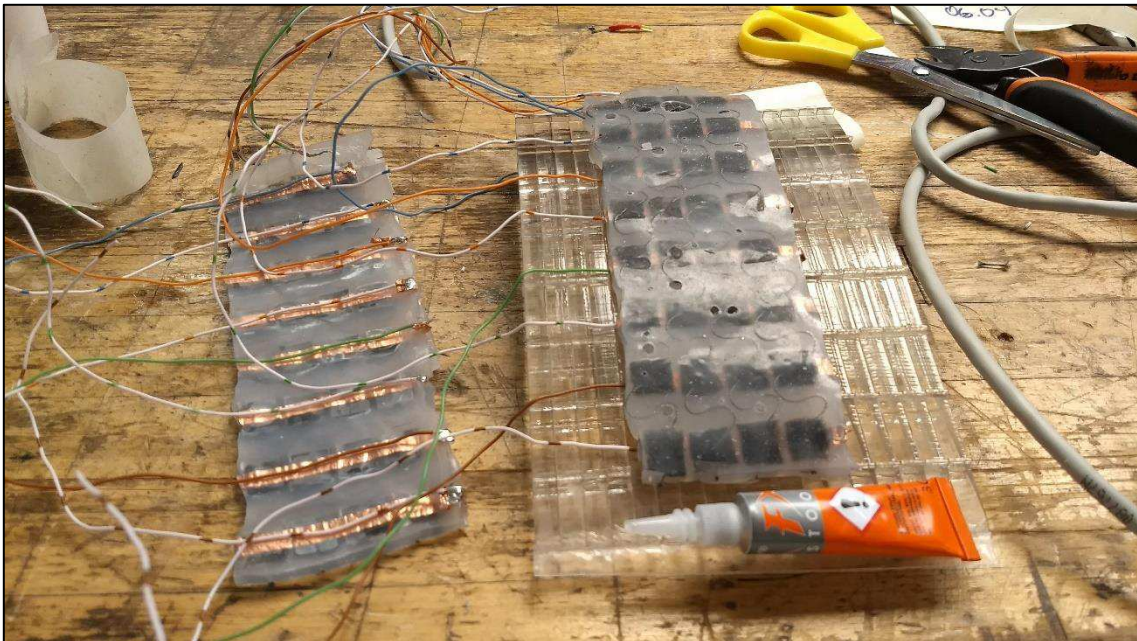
Pieces of sensor skin attached to inner core of mold
